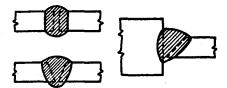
EXAMPLES OF BUTT WELDS
